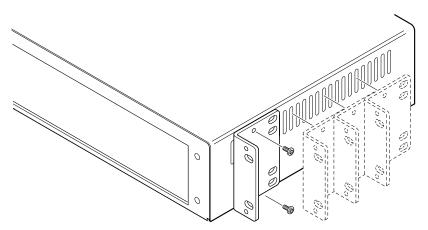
Attaching Mounting Flanges for the 19-inch Equipment Racks
